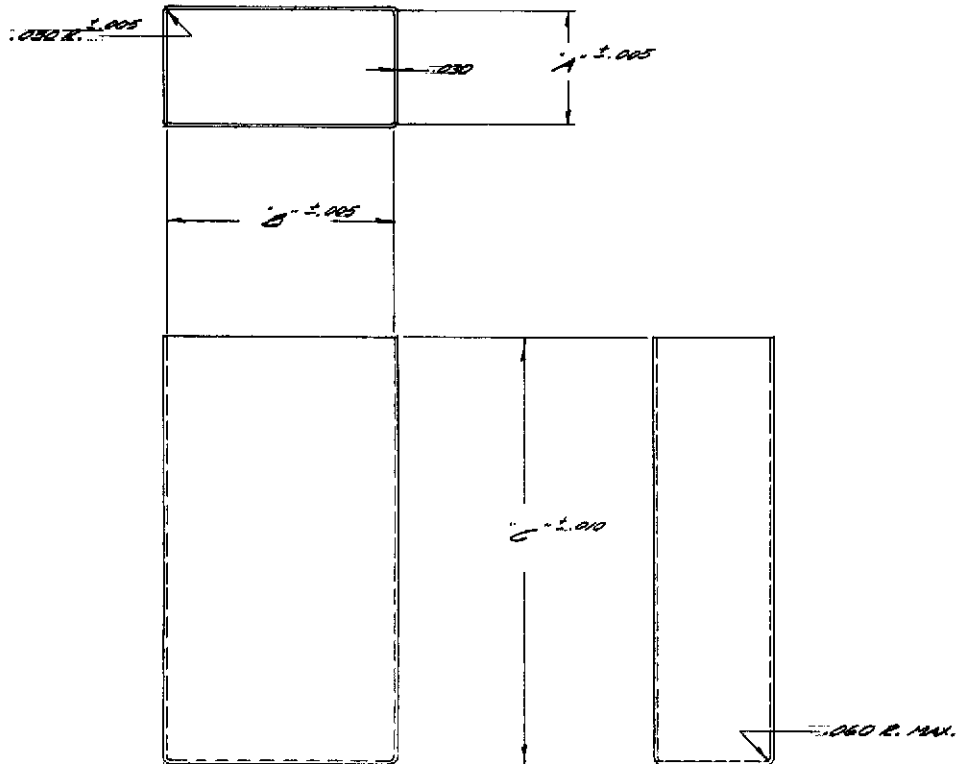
Stainless Steel Cover and Ceramic Seal Assembly
